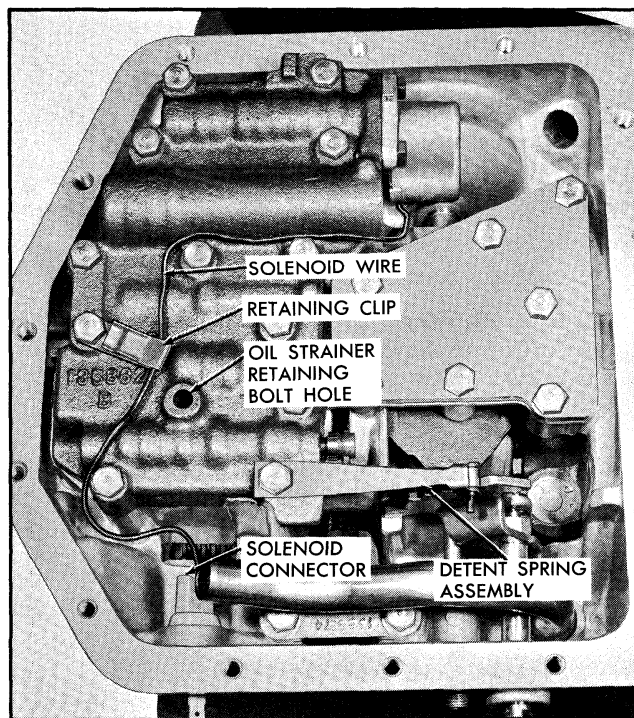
B-50 Transmission - Oil Pan and Strainer Removed
